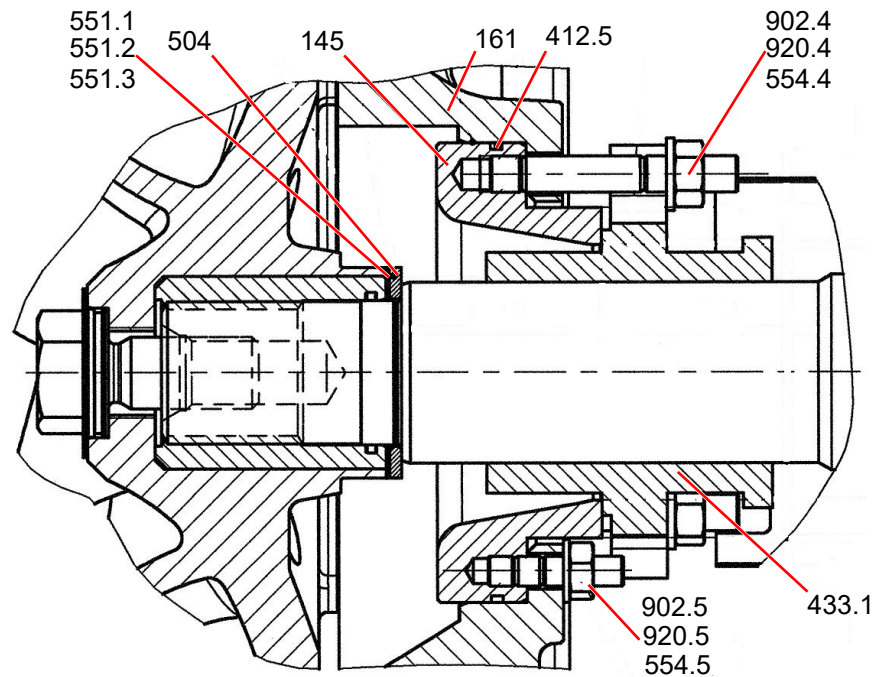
STANDARD Cartridge seal BS42 – BS100
